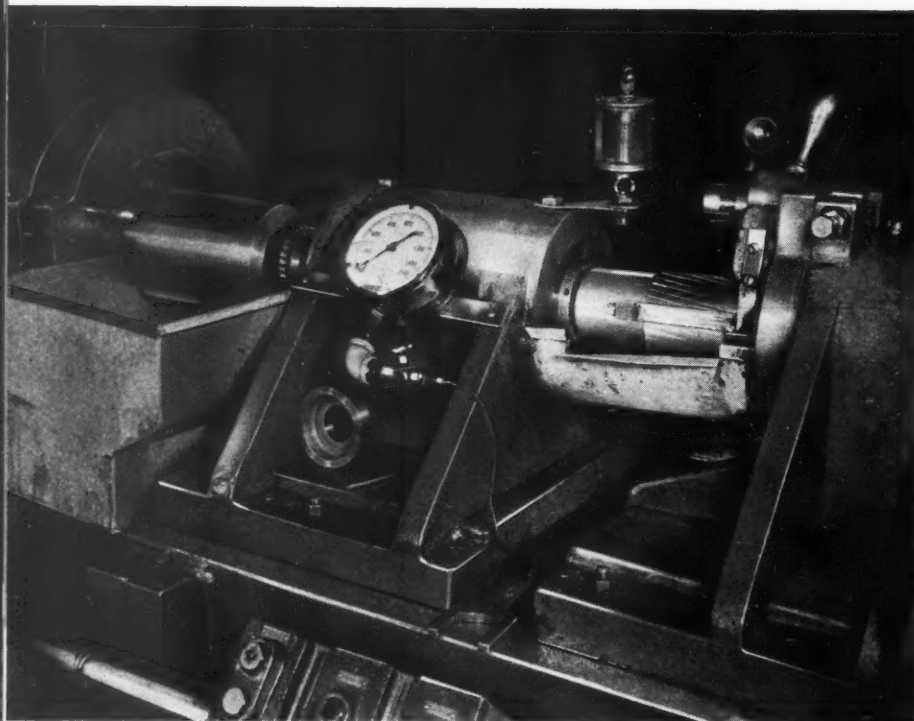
Close-up view of rifling operation, showing one of the thirty-six broaches used on each gun barrel about to enter gun bore
